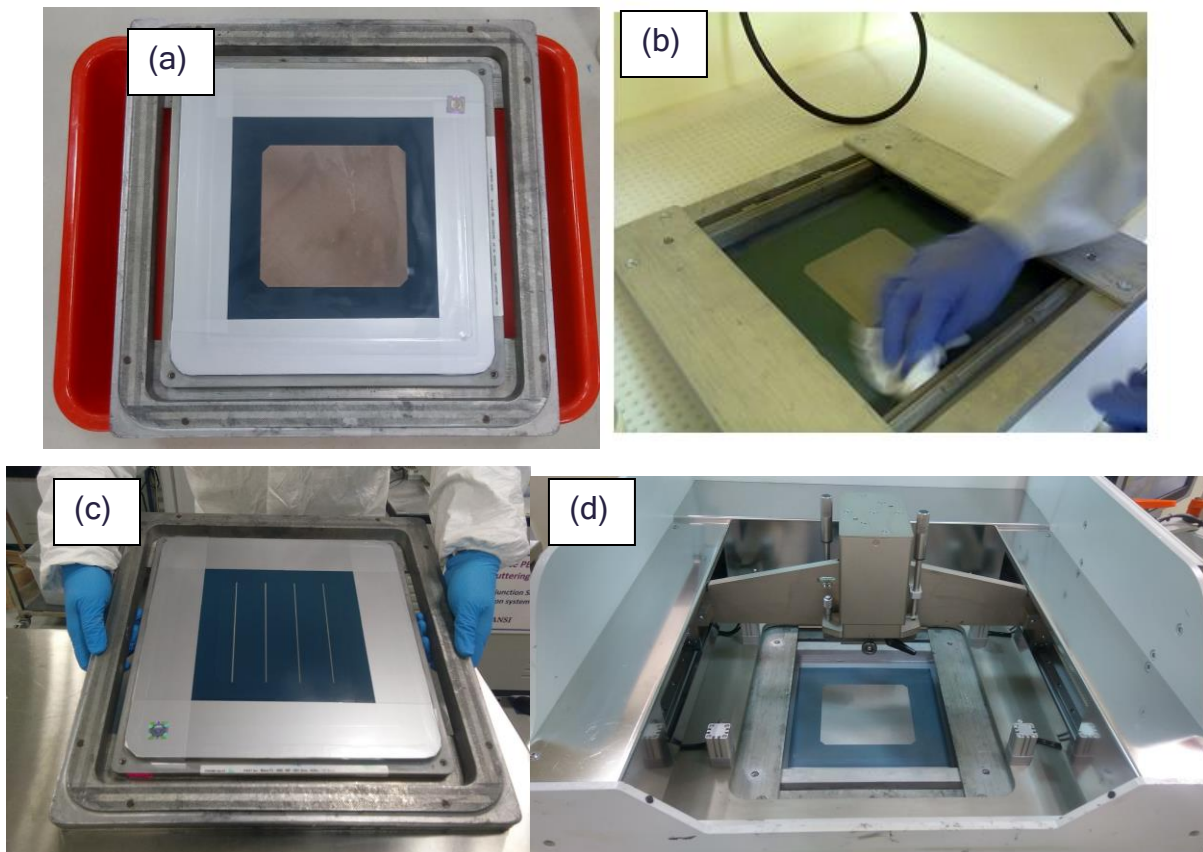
(a) Back side Al printing screen with screen frame (b) Cleaning of screen prior to printing in the chemical wet bench (c) Front side Ag printing screen (d) After screen fixing in printer
